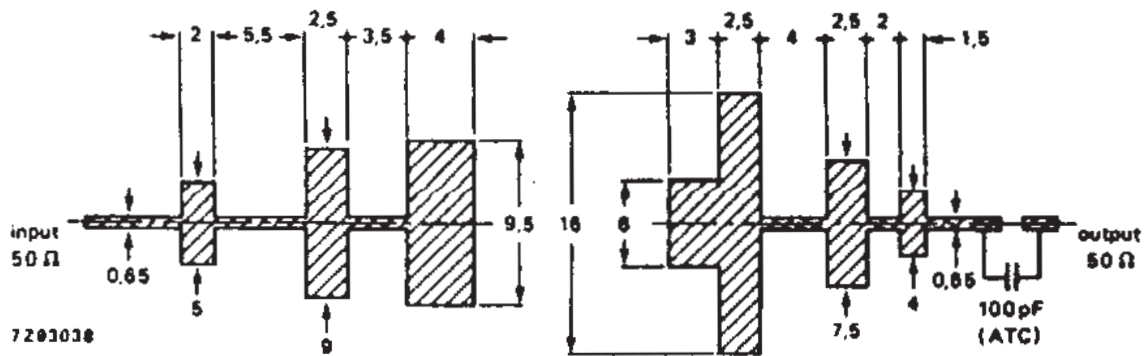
Prematching test circuit boards for 2,0 to 2,4 GHz (dimensions in mm); Epsilam p.c. board; thickness 0,635 mm;  $\epsilon_r = 10$ .
